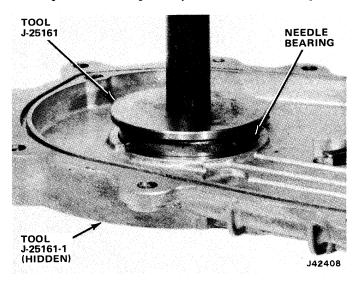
Installing Drive Sprocket Rear Needle Bearing
